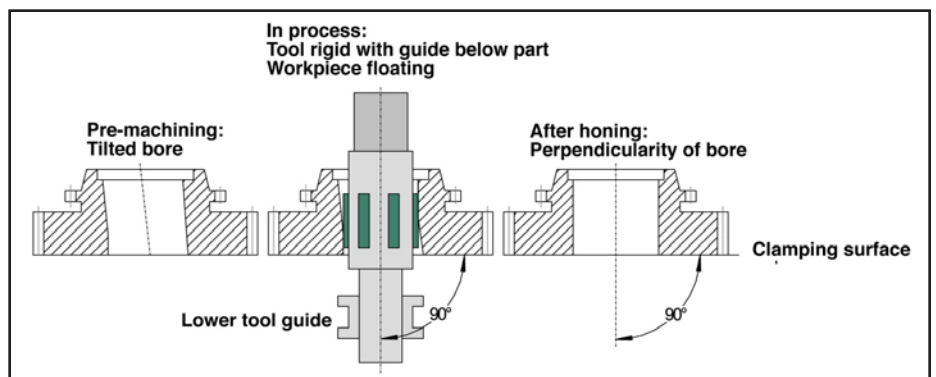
Machining principle for position correction of gear wheel bores in gear wheels.
